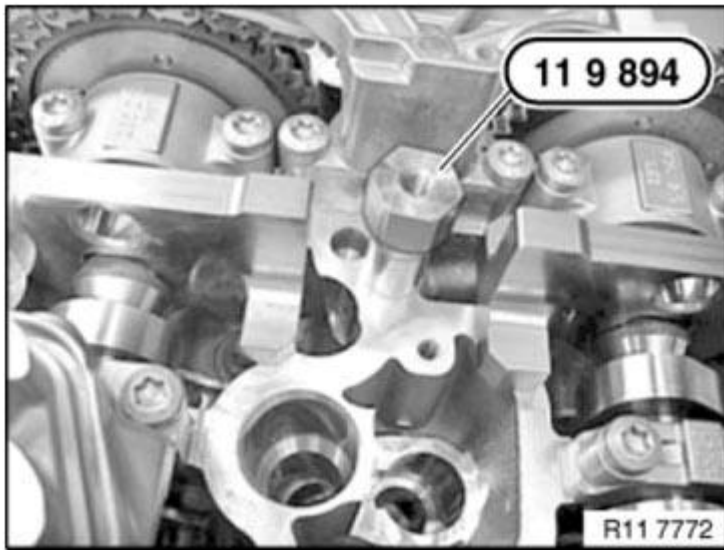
Identifying Special Tool 11 9 893 On Intake Camshaft And Exhaust Camshaft
